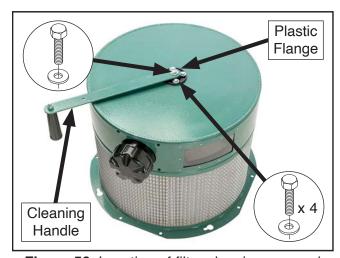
Location of filter cleaning arm and plastic flange fasteners.
